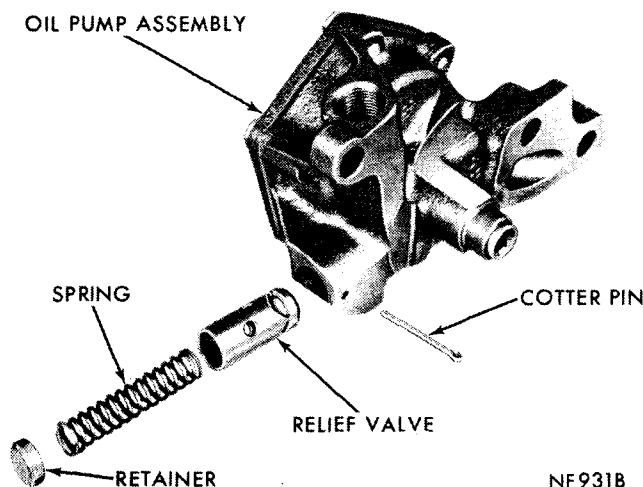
Relief Valve, Spring and Retainer (Removed)
